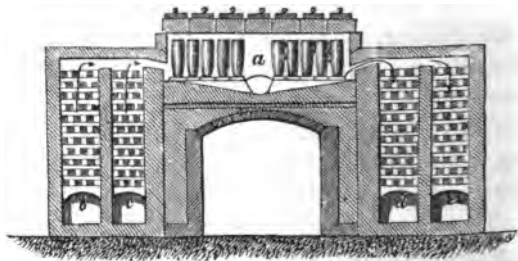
Siemens' cast-steel furnace. Section through melting chamber and regenerators.
